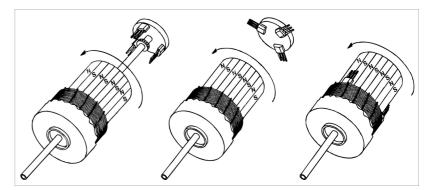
Hall-effect sensors can mount in three locations: inside the motor, at the end of the motor's shaft, and around the rotor shaft's ring magnet.
